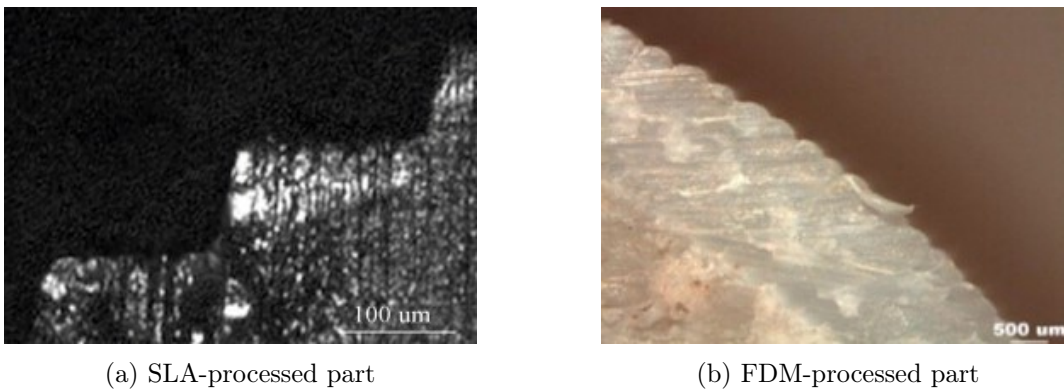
Surface profiles of additively manufactured parts parts [100]
